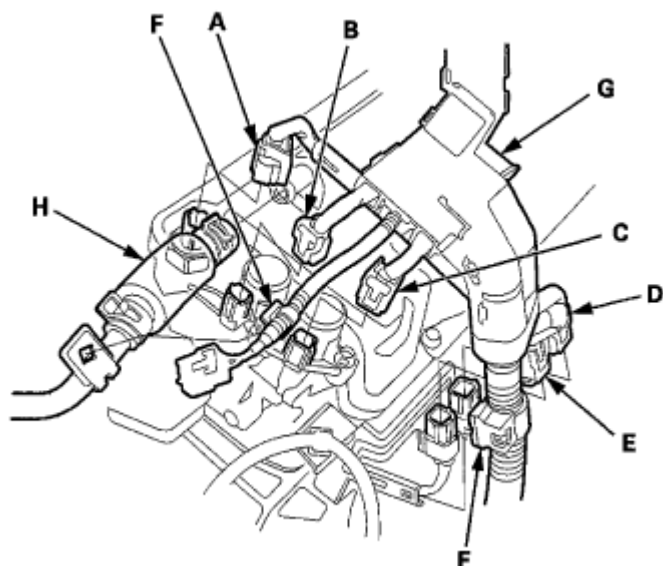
Identifying (Rear Rocker Arm Oil Pressure Switch, Rocker Arm Oil Control Solenoid, Rear A/F Sensor Connector And Rear Secondary HO2S) Connectors
